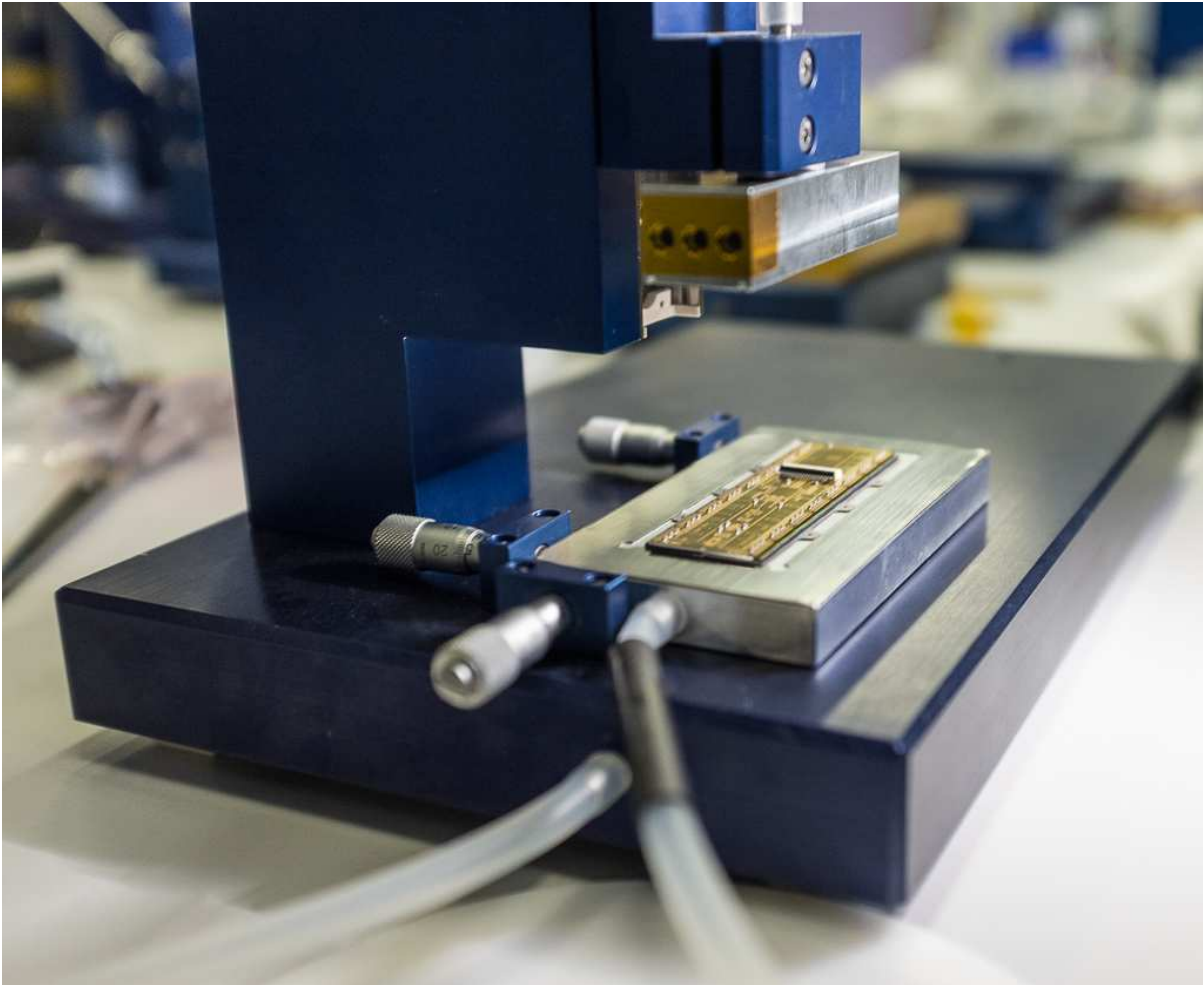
Versatile tool for lamination, gluing and placing of parts as needed during manufacturing steps. In this configuration, the bottom part holds a module via vacuum, aligned by micrometer screw controlled stops. The top part is movable vertically by precision linear guides. Here it is used for holding a part before placing it precisely (image shows state after that). Size indication: module dimensions approx. 22 mm \times 66 mm. Image used by kind permission of CMS pixel group at Paul Scherrer Institut.
